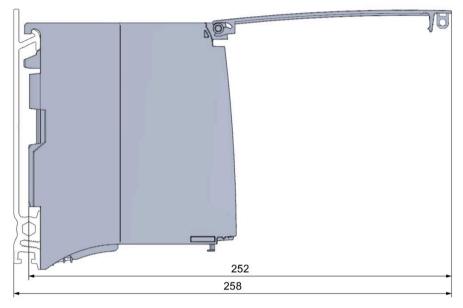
Dimension drawing of the DI 64x24VDC SNK/SRC BA module, side view with open front cover
